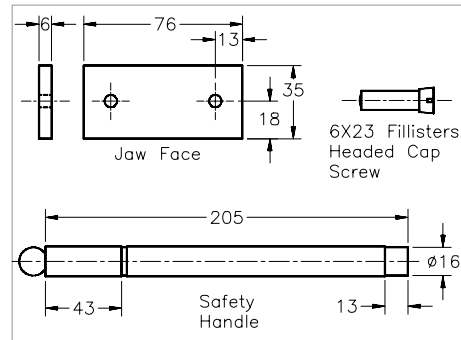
Dimensions of the Jaw Face, the Cap Screw, and the Safety Handle
